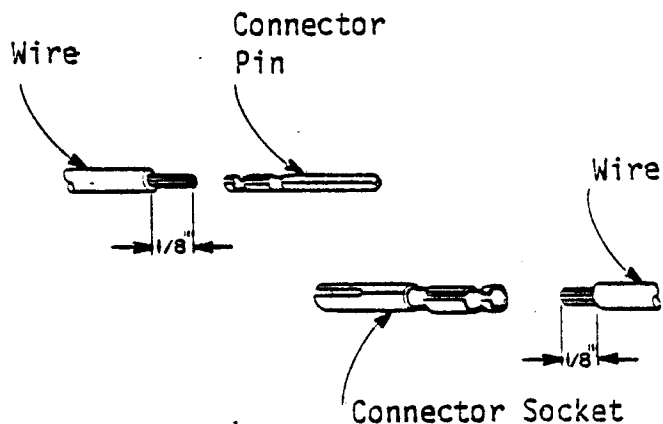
A. Connector Pin and Connector Socket Wire Insertion
